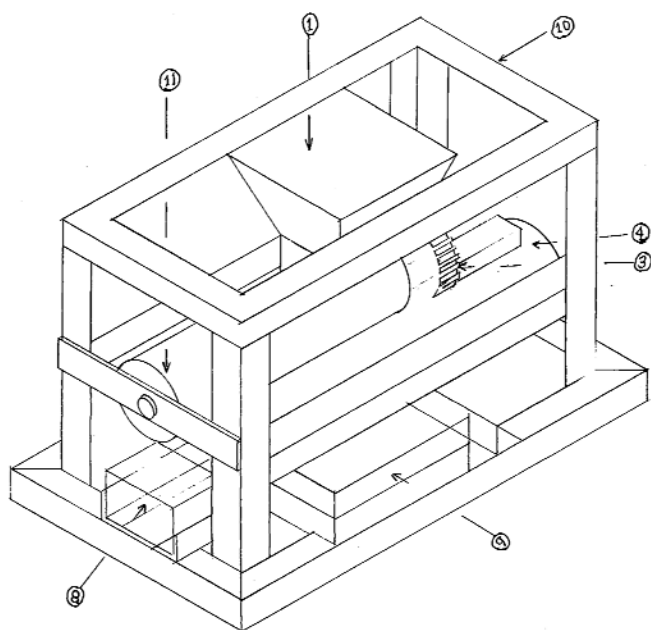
The technical view of the Fruits Juice Extracting Machine
